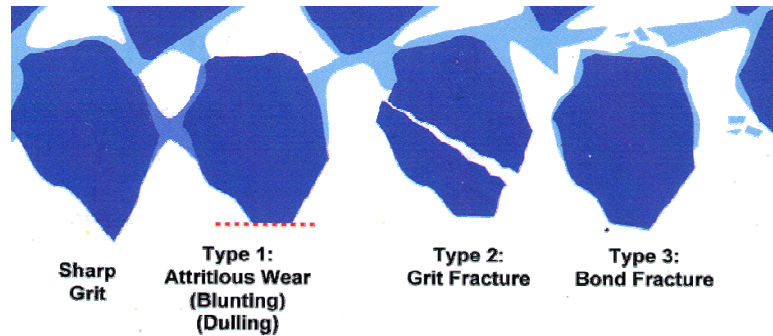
Micro-wear mechanisms in abrasive grains: sharp grit, attritious wear, grit fracture and bond fracture [4].
